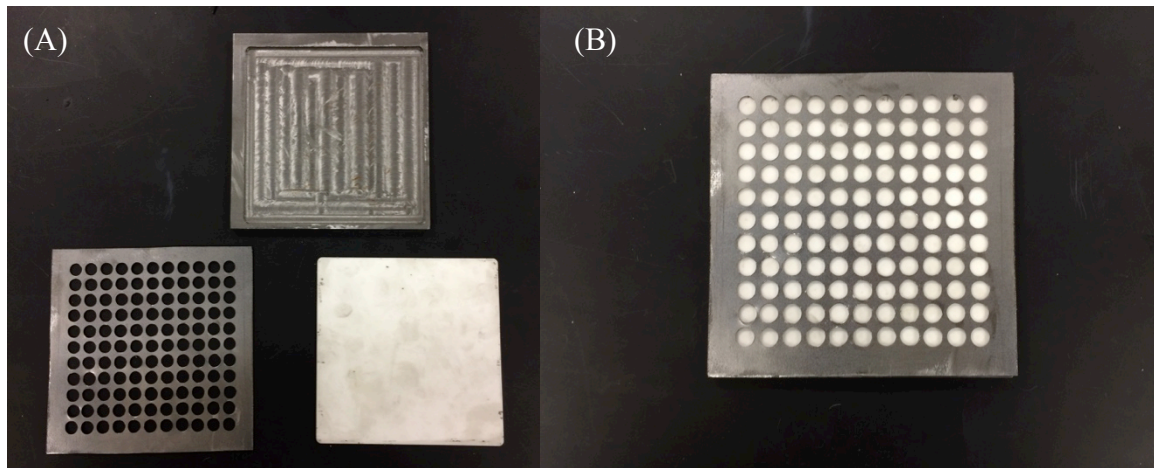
Sample fabricated through traditional machining methods displaying (A) different components and (B) assembled sensor
